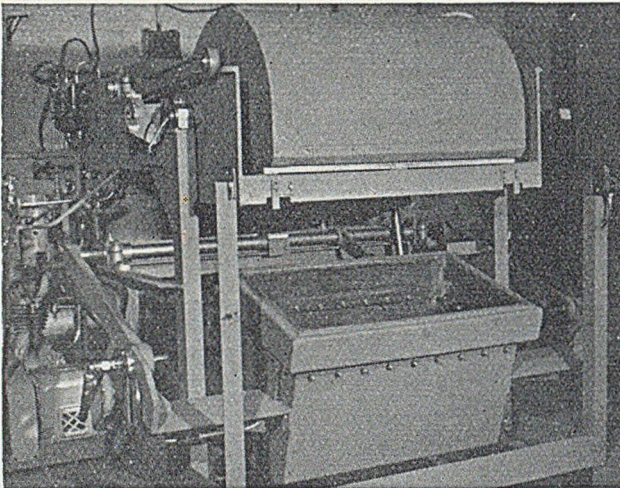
(left).—Prototype "Autoclino" Shell-moulding Machine.
